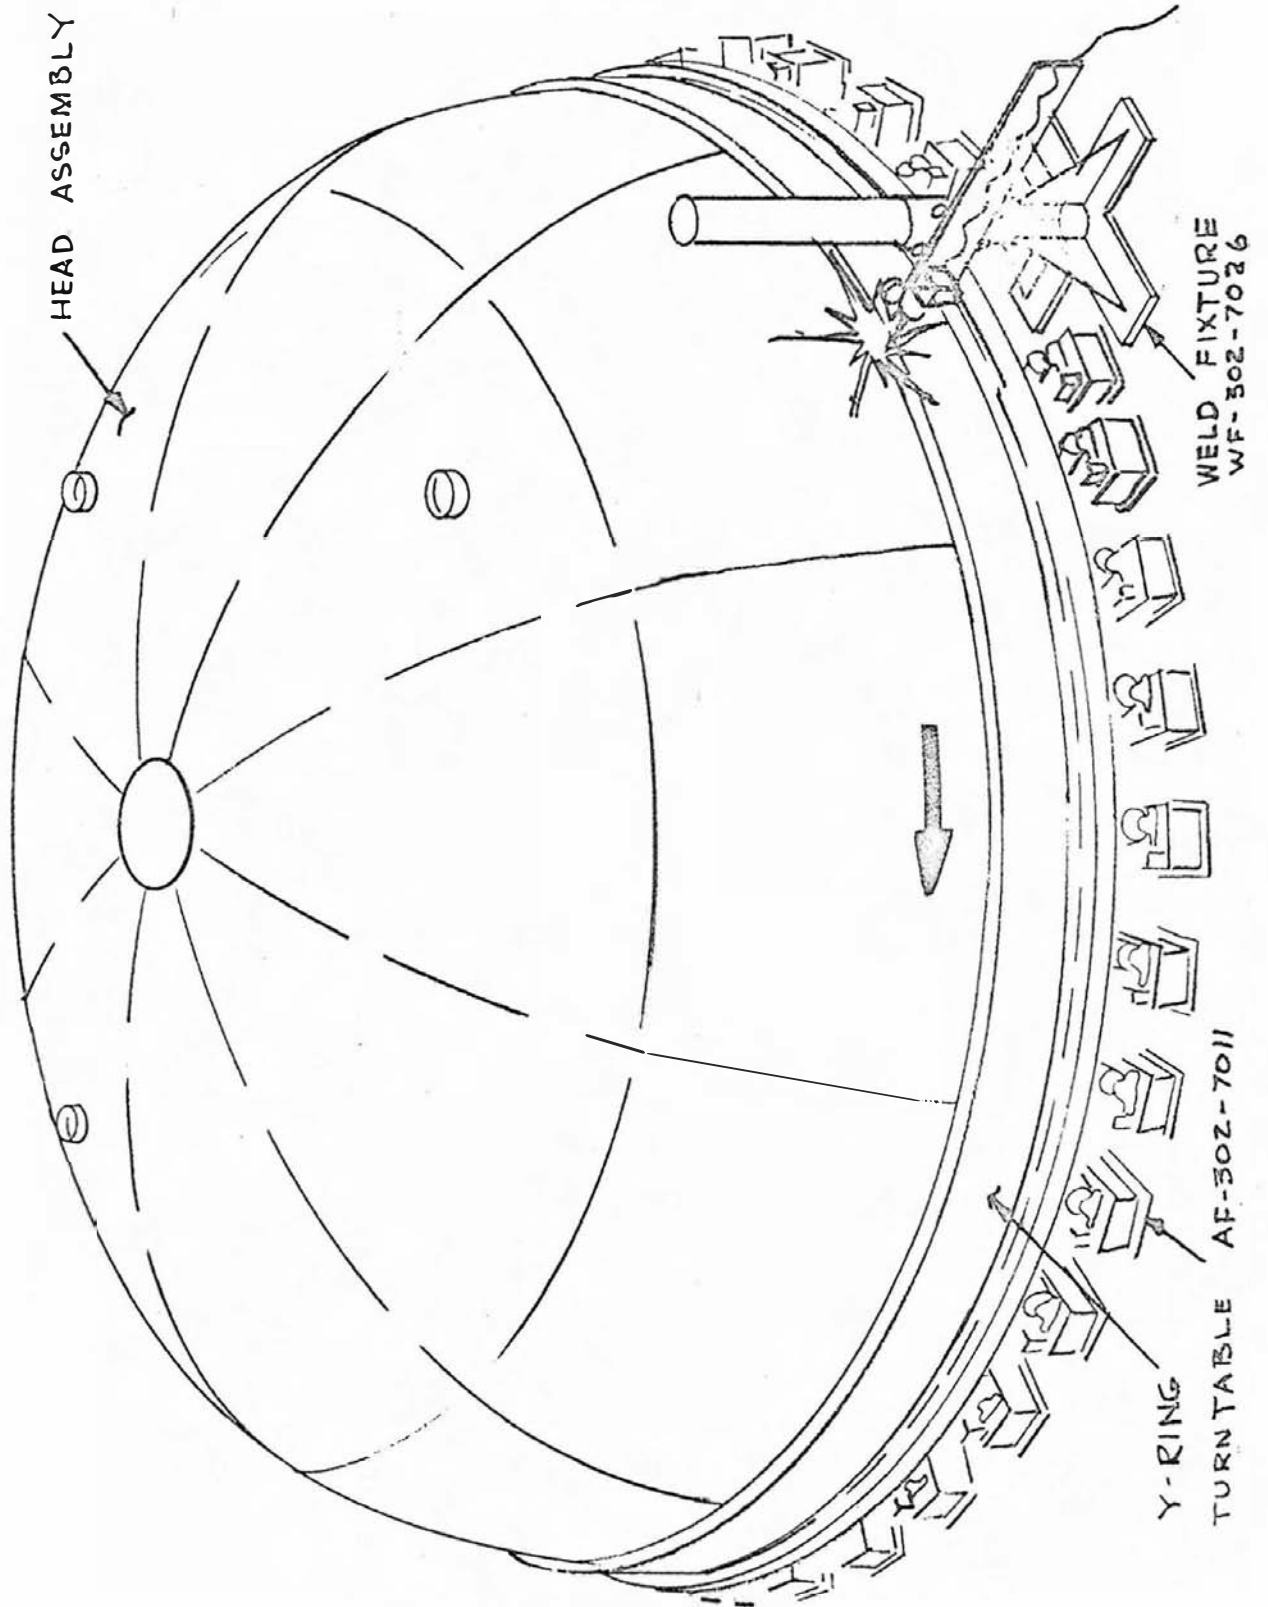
Welding Y-Ring to Head Assembly
